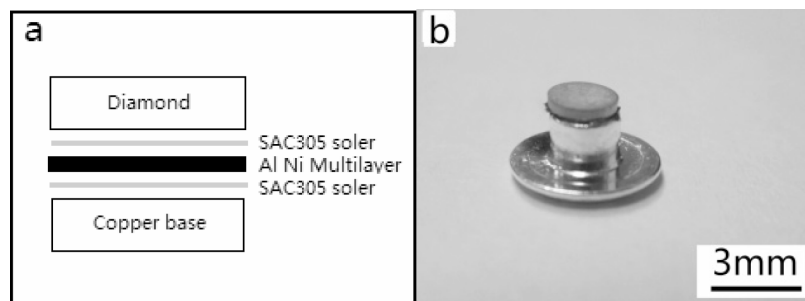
Bonding method show, (a) Sandwich joining method setup (b) the joined parts
